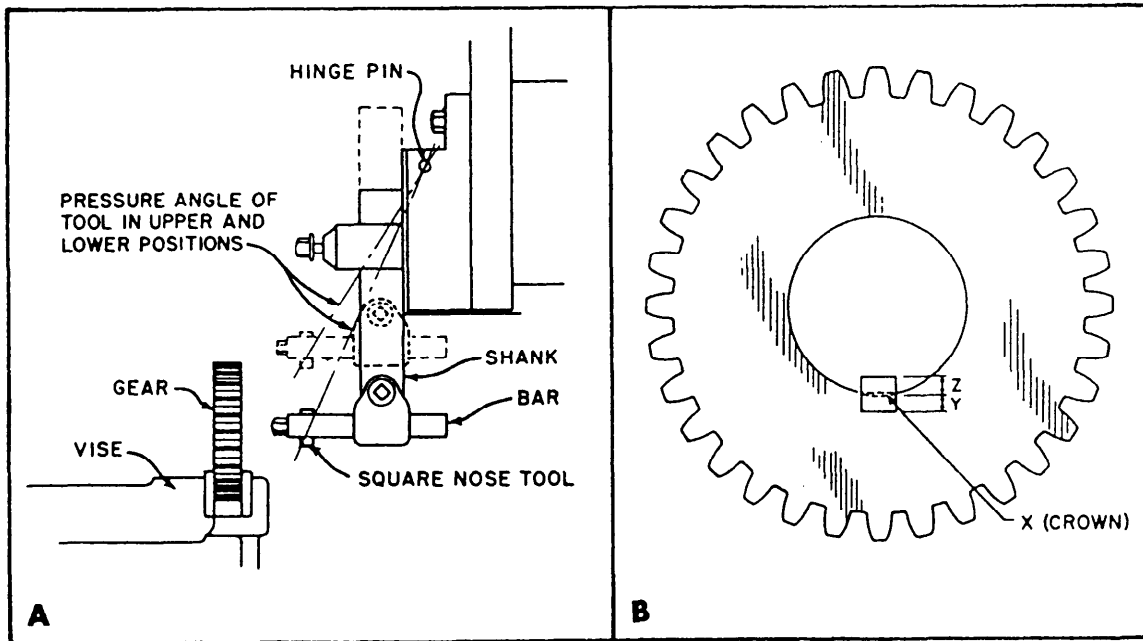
Internal keyway: A. Shaping an internal keyway in a gear. B. Depth of keyways.
